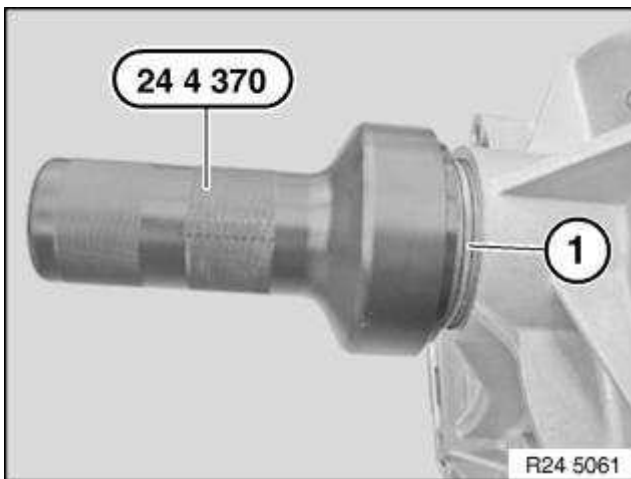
Oil Sealing Lip On Radial Shaft Seal (1)
